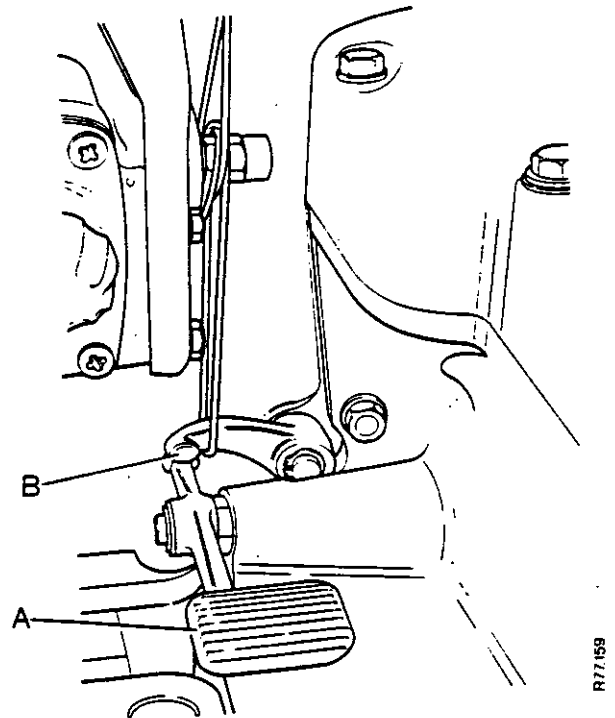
DIFFERENTIAL LOCK PEDAL HELD IN ENGAGED POSITION
